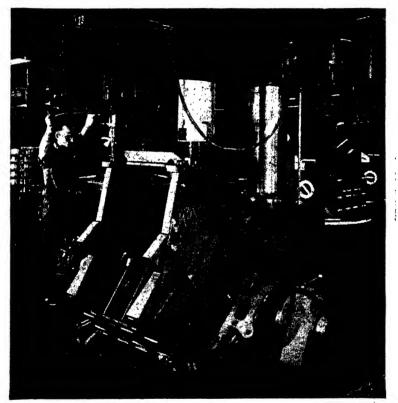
This gun mount is tilted to make the holes in various planes accessible.
